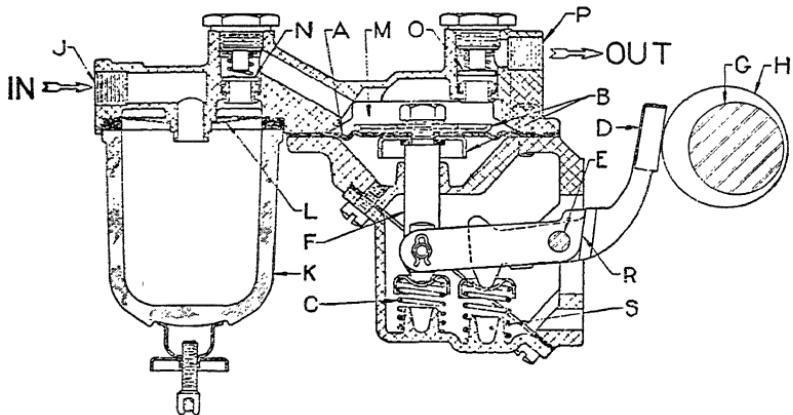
"AC" Fuel Pump—Sectional View of Type "B"
